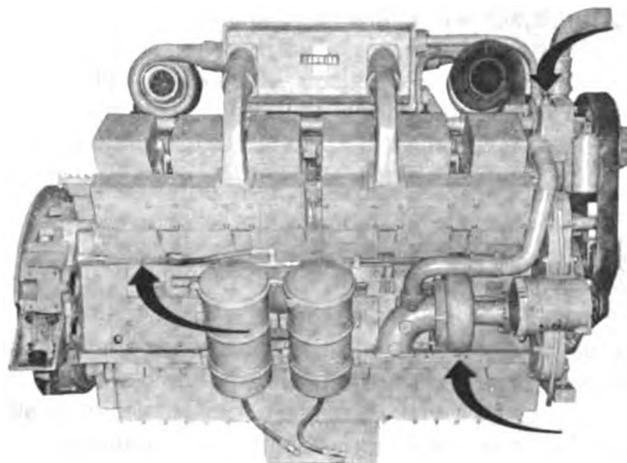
, (K21903). Coolant drain point — KT(A)-2300 Engine
